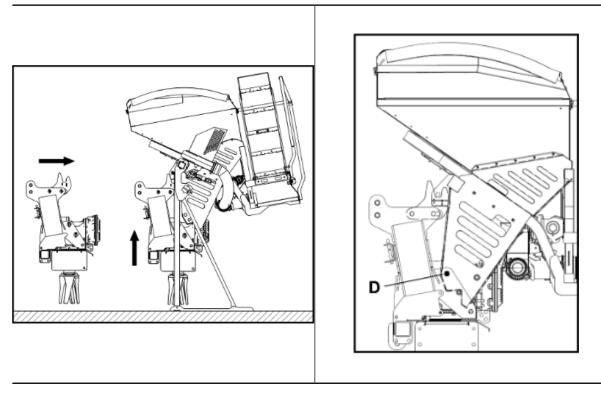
Connection of the front hopper with ALPEGO Fig. 8 Connection of the front hopper with ALPEGO machines machines
